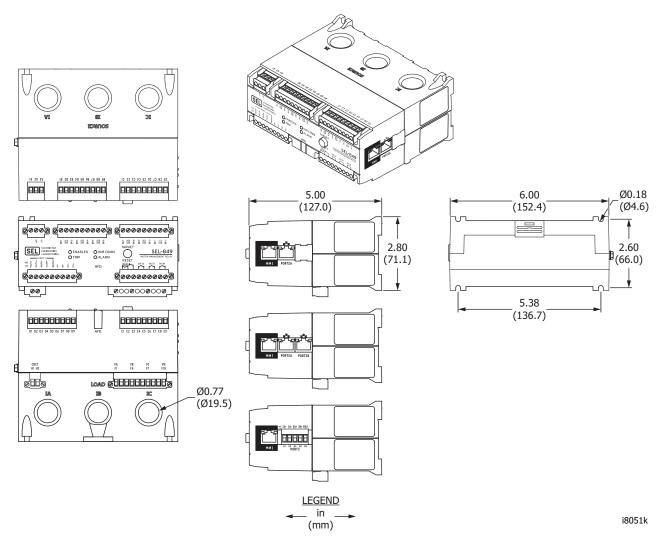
SEL-849 Motor Management Relay Installation Drawings
